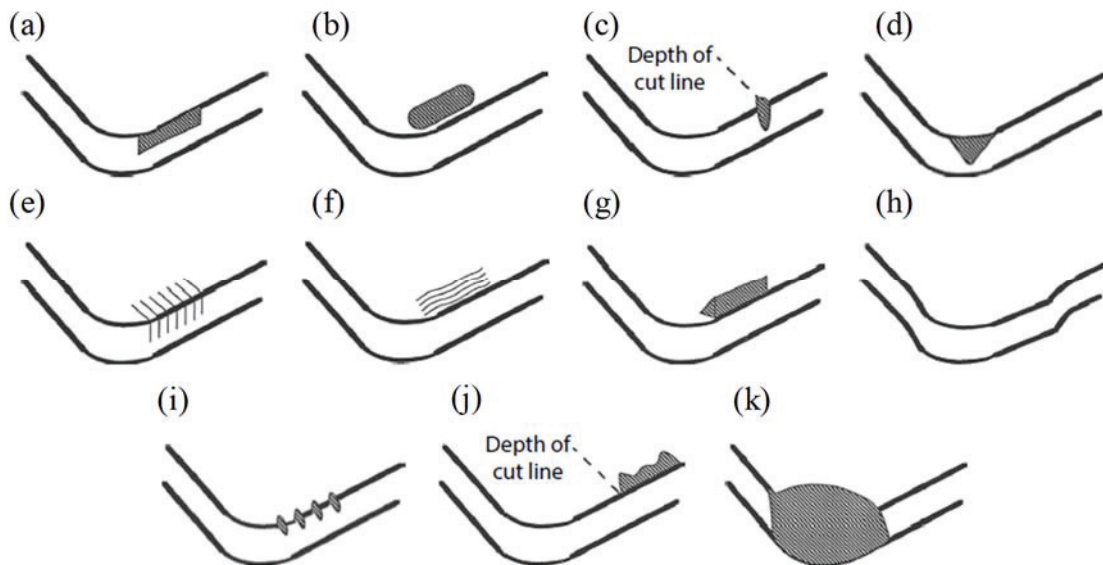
Types of wear on cutting tools: (a) flank wear; (b) crater wear; (c) notch wear; (d) nose radius wear; (e) comb (thermal) cracks; (f) parallel (mechanical) cracks; (g) built-up edge; (h) gross plastic deformation; (i) edge chipping or frittering; (j) chip hammering; (k) gross fracture⁴.
